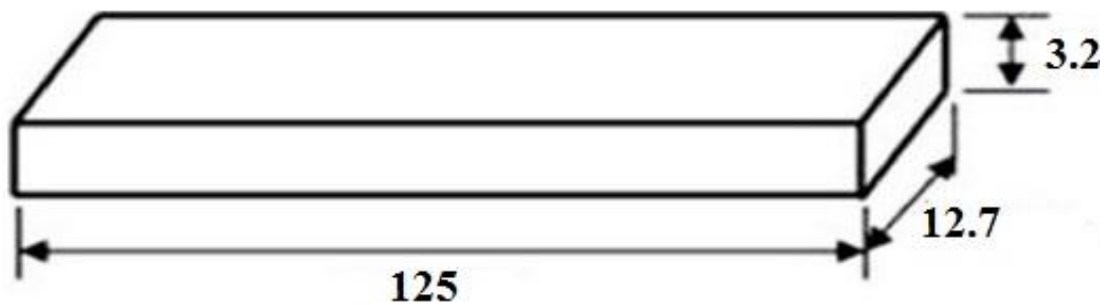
Bending test specimens according to ASTM D790. All dimensions are in (mm).
